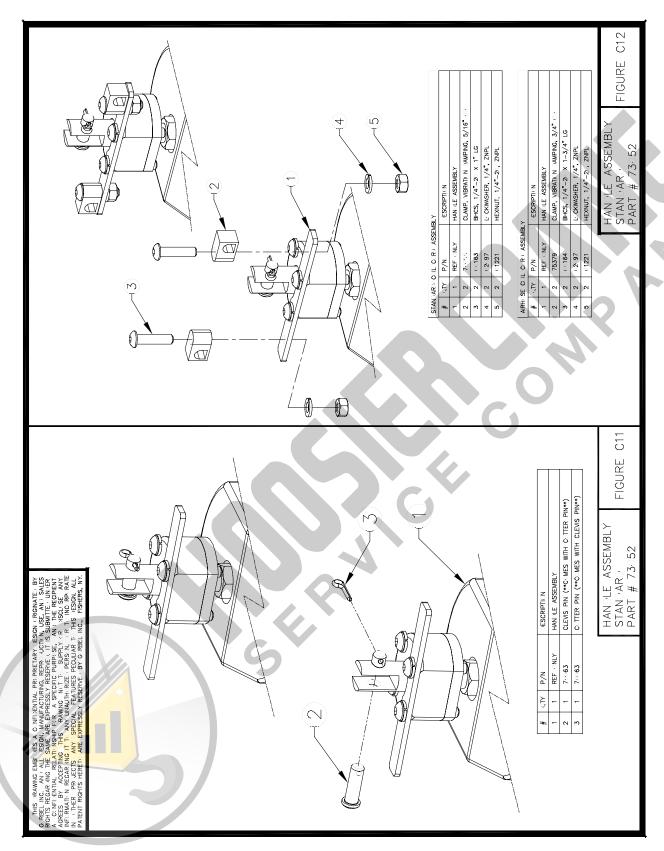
(bottom) & Figure C12 (top). Standard Handle Assembly.
